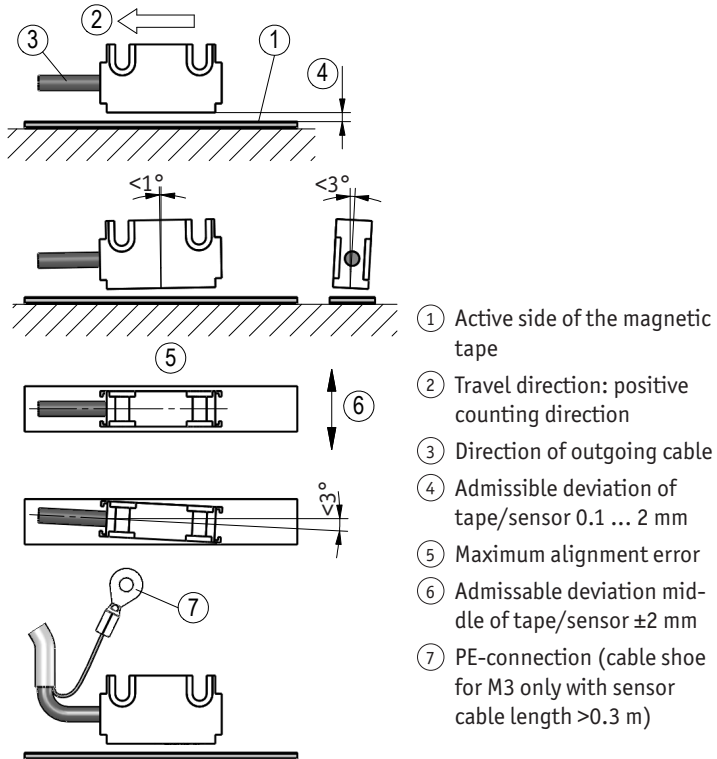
Definition of the counting direction with magnetic tape and assemblage sensor / magnetic tape, gap measure, tolerances
